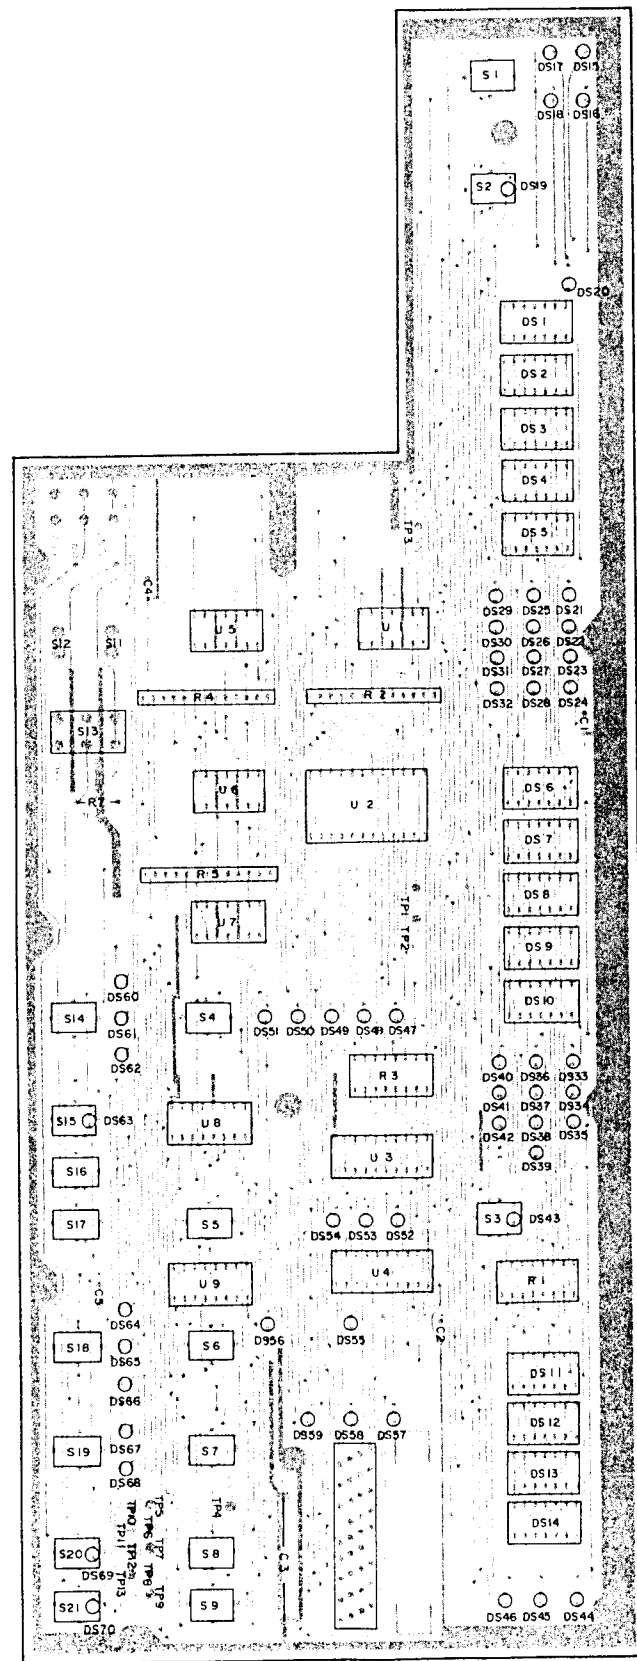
XX. A4 POWER SUPPLY Board Assembly Component Locations.
